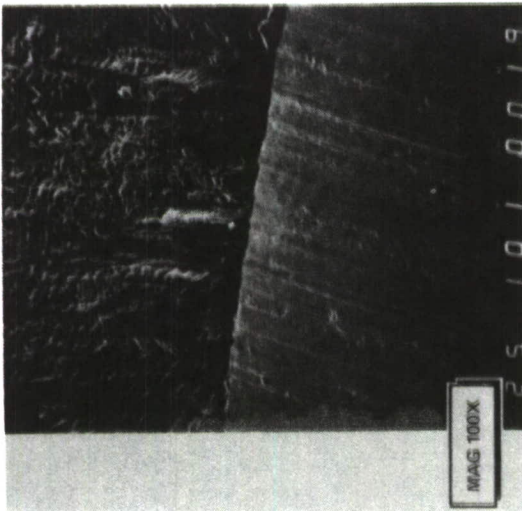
Morphology of a Crack Initiating from a Point Source, Improved Drilling Fastener Hole (Small EIFS)
